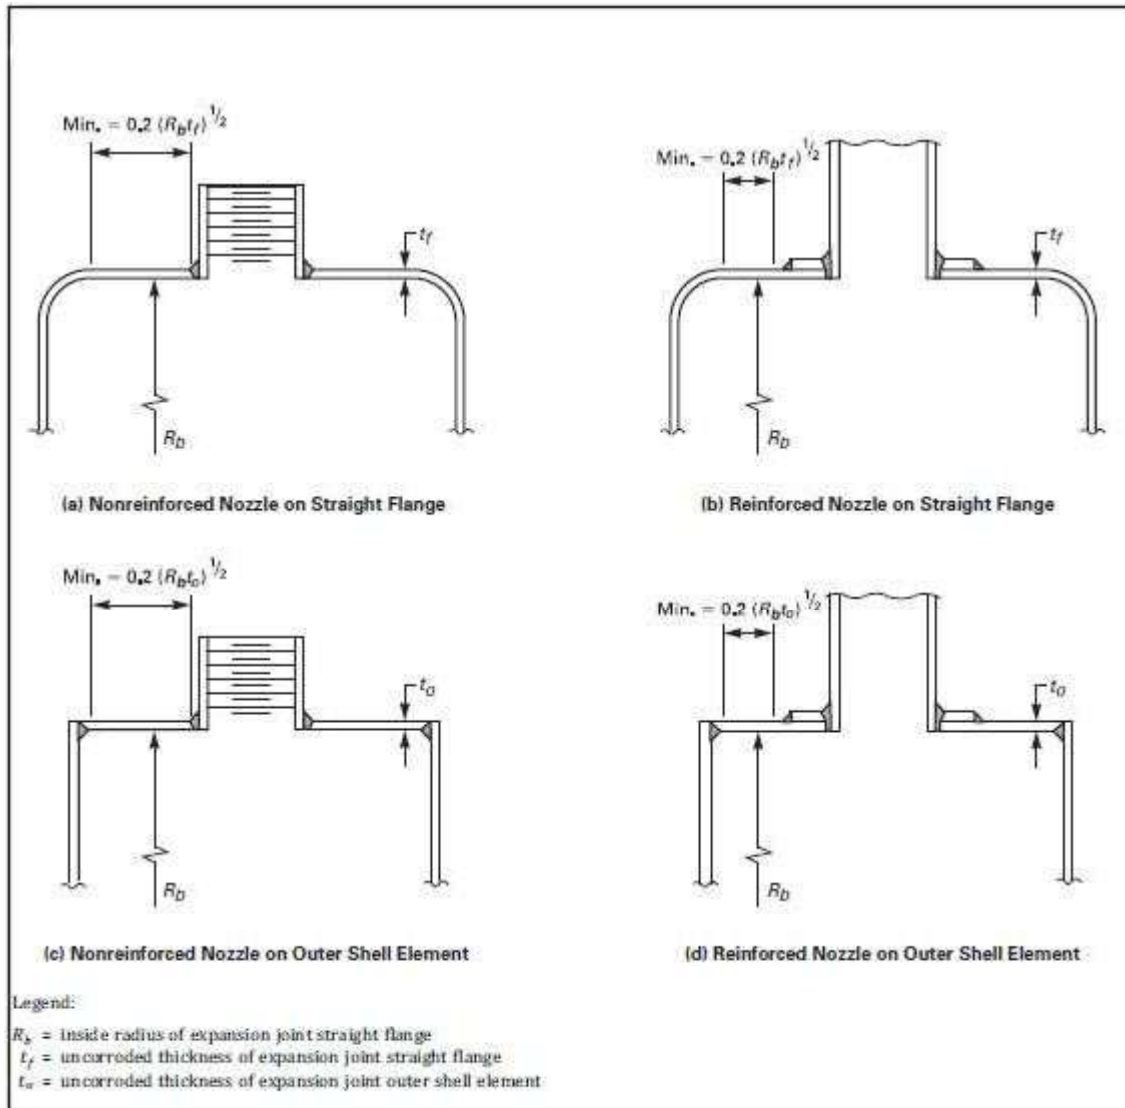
Typical Nozzle Attachment Details Showing Minimum Length of Straight Flange or Outer Shell Element
